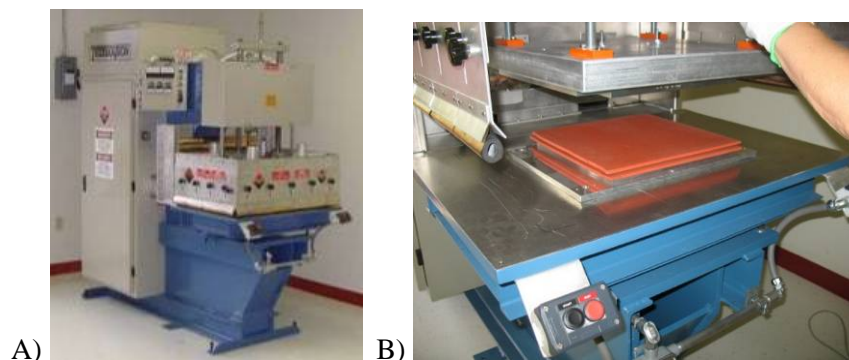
Photographs of A) the RF press used for fabricating test coupons, and B) the press opened, with a sample loaded on the lower platen.
